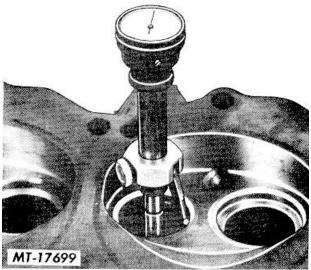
Using Gauge from SE-1631 Tool Grinder Set for Checking Seat Runout
